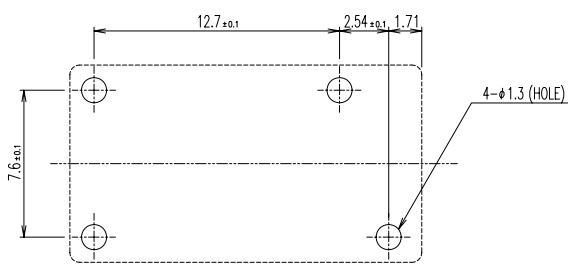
FIGURE FOR PRINTED CIRCUIT BOARD PROCESSING (BOTTOM VIEW)
